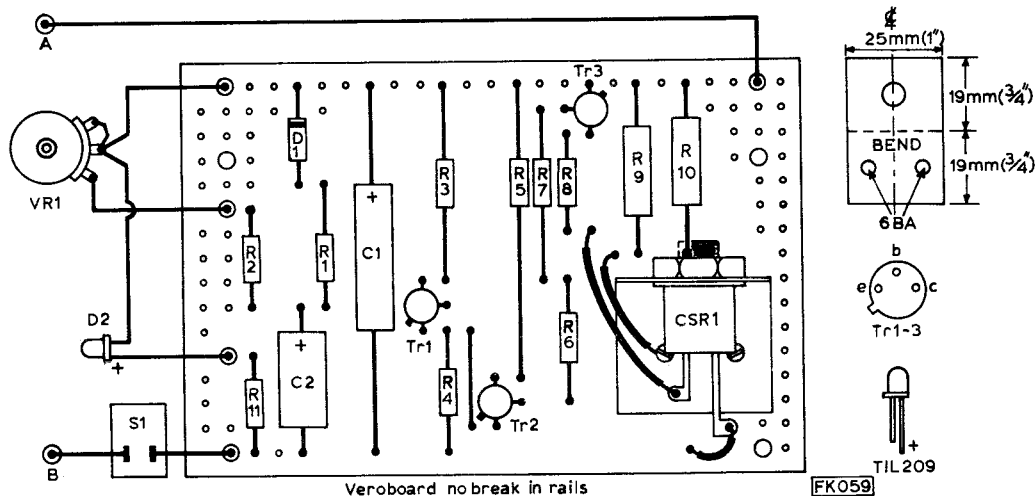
Layout of the components on the Veroboard panel and interwiring details. The copper strips run horizontally. The connection to the thyristor anode is made via a solder tag on the heatsink
